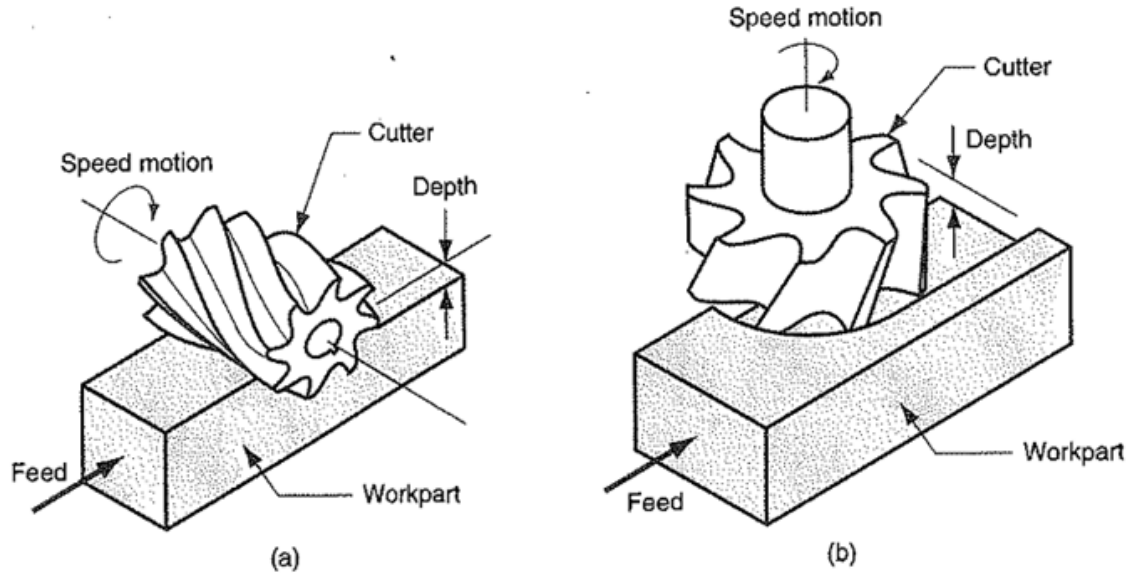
Two basic types of milling operations: (a) Peripheral or Plain milling and (b) Face milling.
